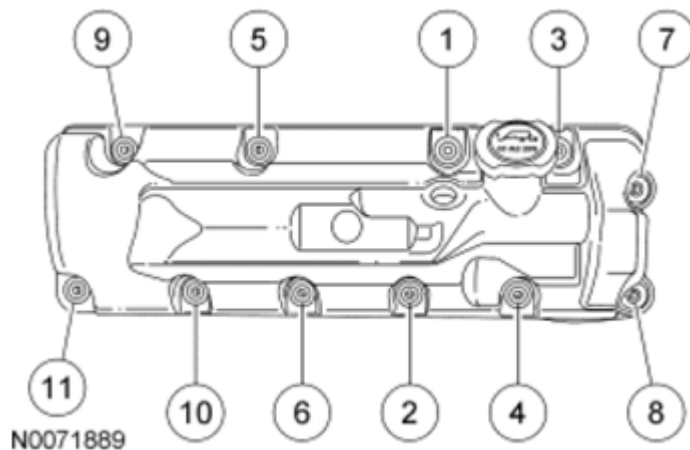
Identifying Valve Cover Fasteners Tightening Sequence
